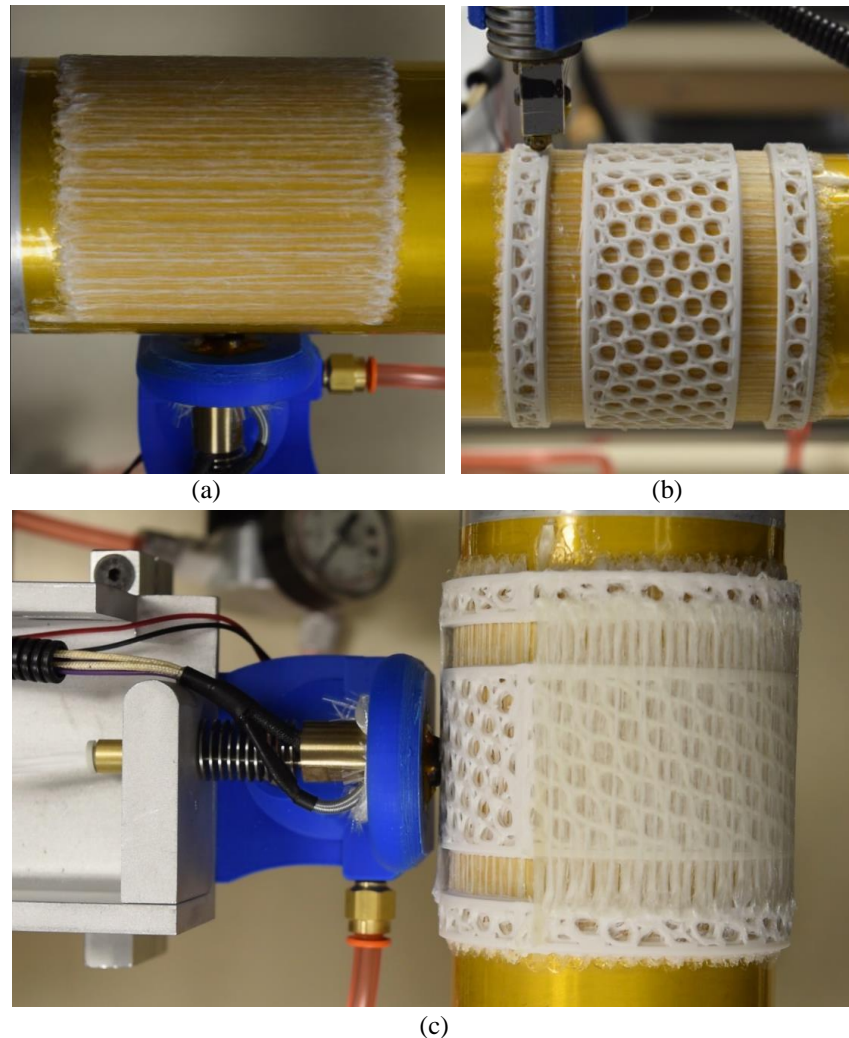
The manufacturing of the base layer (a), honeycomb core (b) and top face sheet (c) for a composite tube with longitudinal reinforcement is shown.
